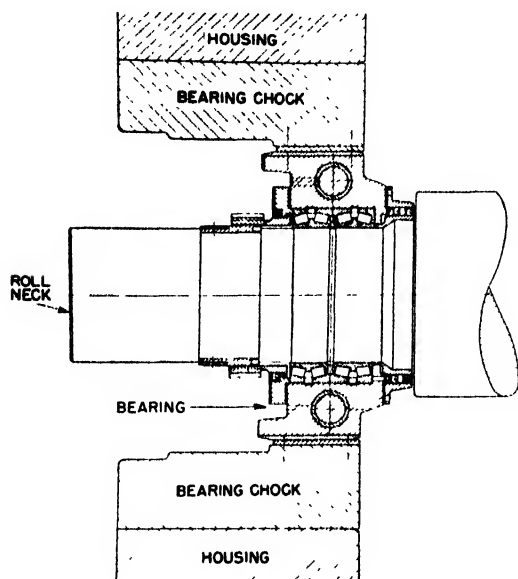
Horizontal section through the center-line of a bottom work-roll chock on a plate mill equipped with roller bearings.
